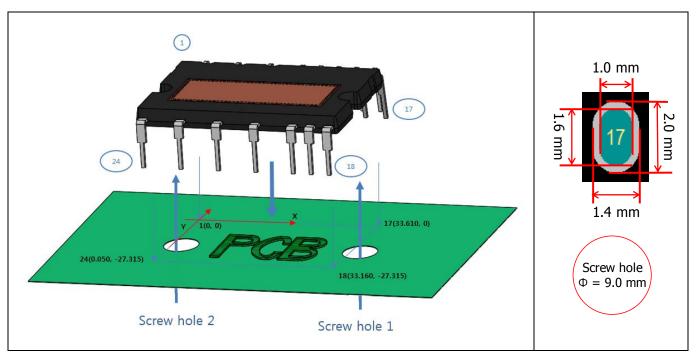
IM818 position on PCB (Unit: [mm]) and example of pad design(1~24pin)
